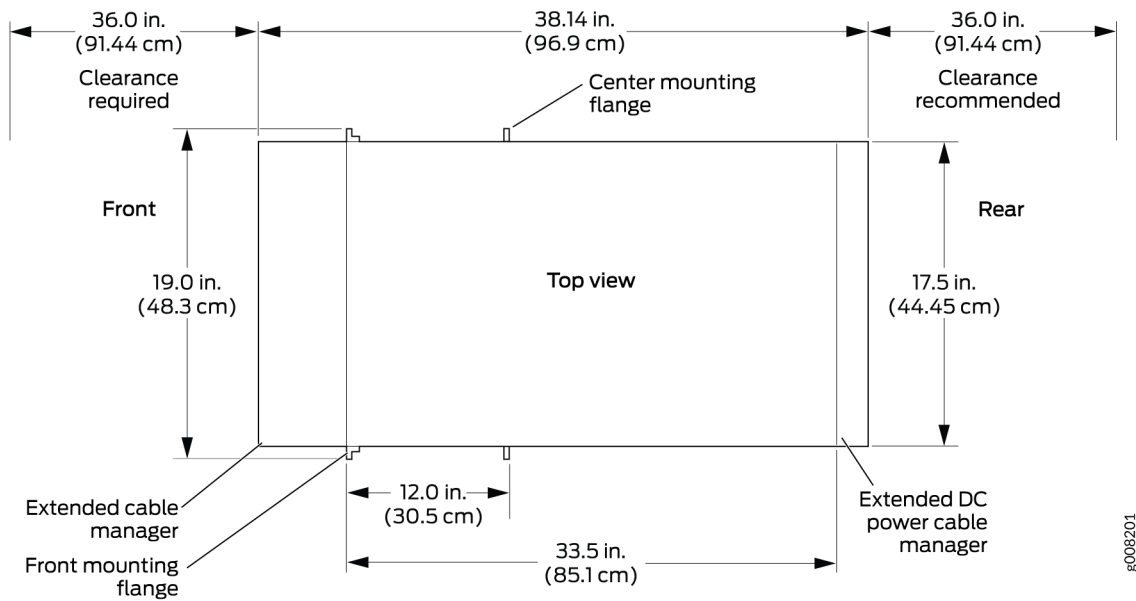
Chassis Dimensions and Clearance Requirements for a DC-powered MX2010 with an Extended Cable Manager
